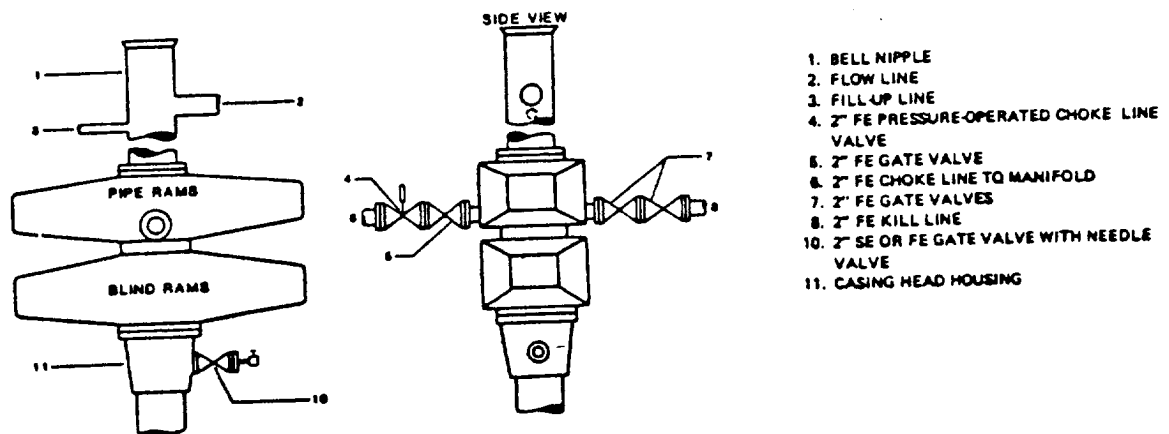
Standard Hydraulic Blowout Preventer Assembly (2 M or 3 M Working Pressure) Alternative 3 (without Drilling Spool)
